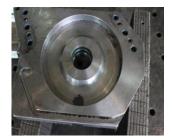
Step 3 to Take Out the Blade-rest Shaft
